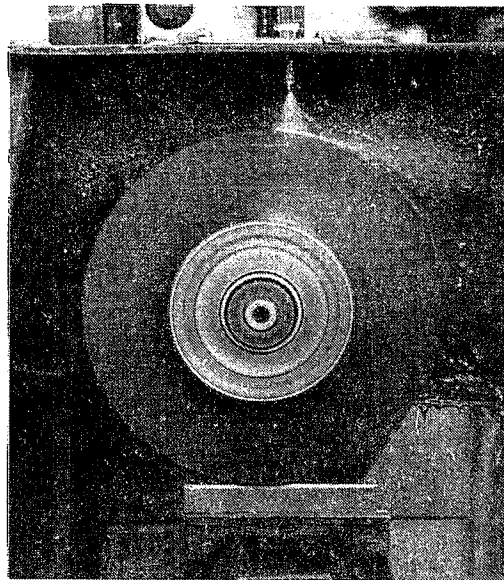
Cleaning of the grinding wheel with a water jet directed from the nozzle mounted on the safety cover of the grinding wheel.
